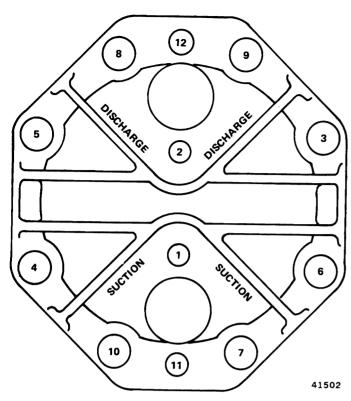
Compressor Head Attaching Screw Tightening Sequence
